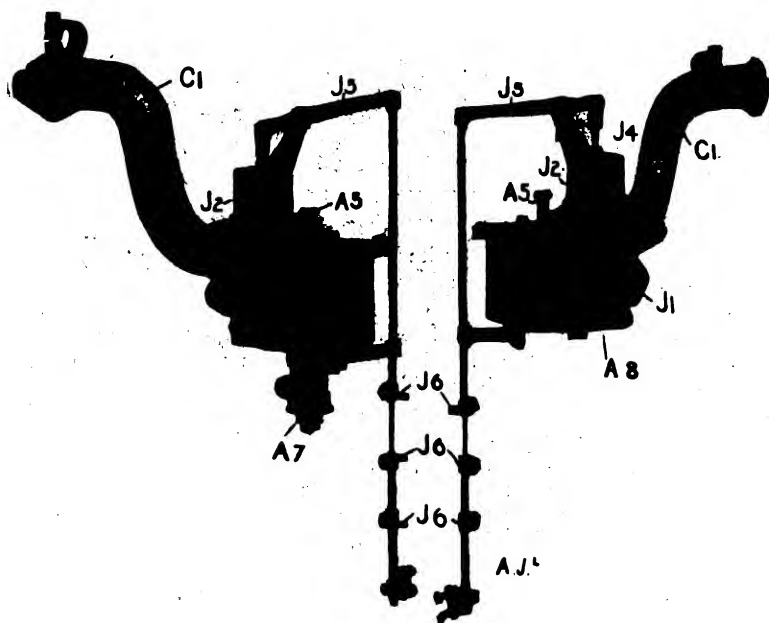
Two views of the De Dietrich Carburettor, with one of the induction-pipes (C^1) in place.
